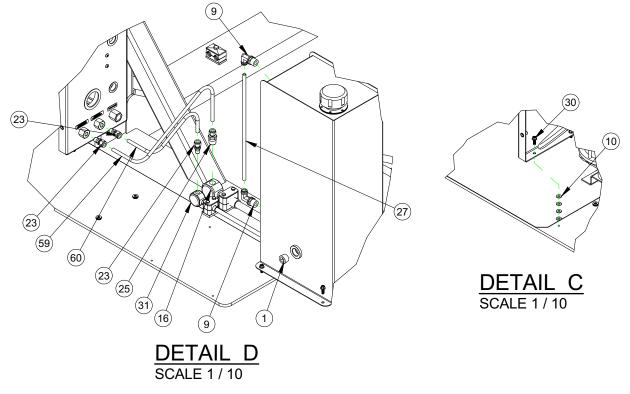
USV-16-200T ASSEMBLY DETAIL C AND D 2 (P/N 91593)
